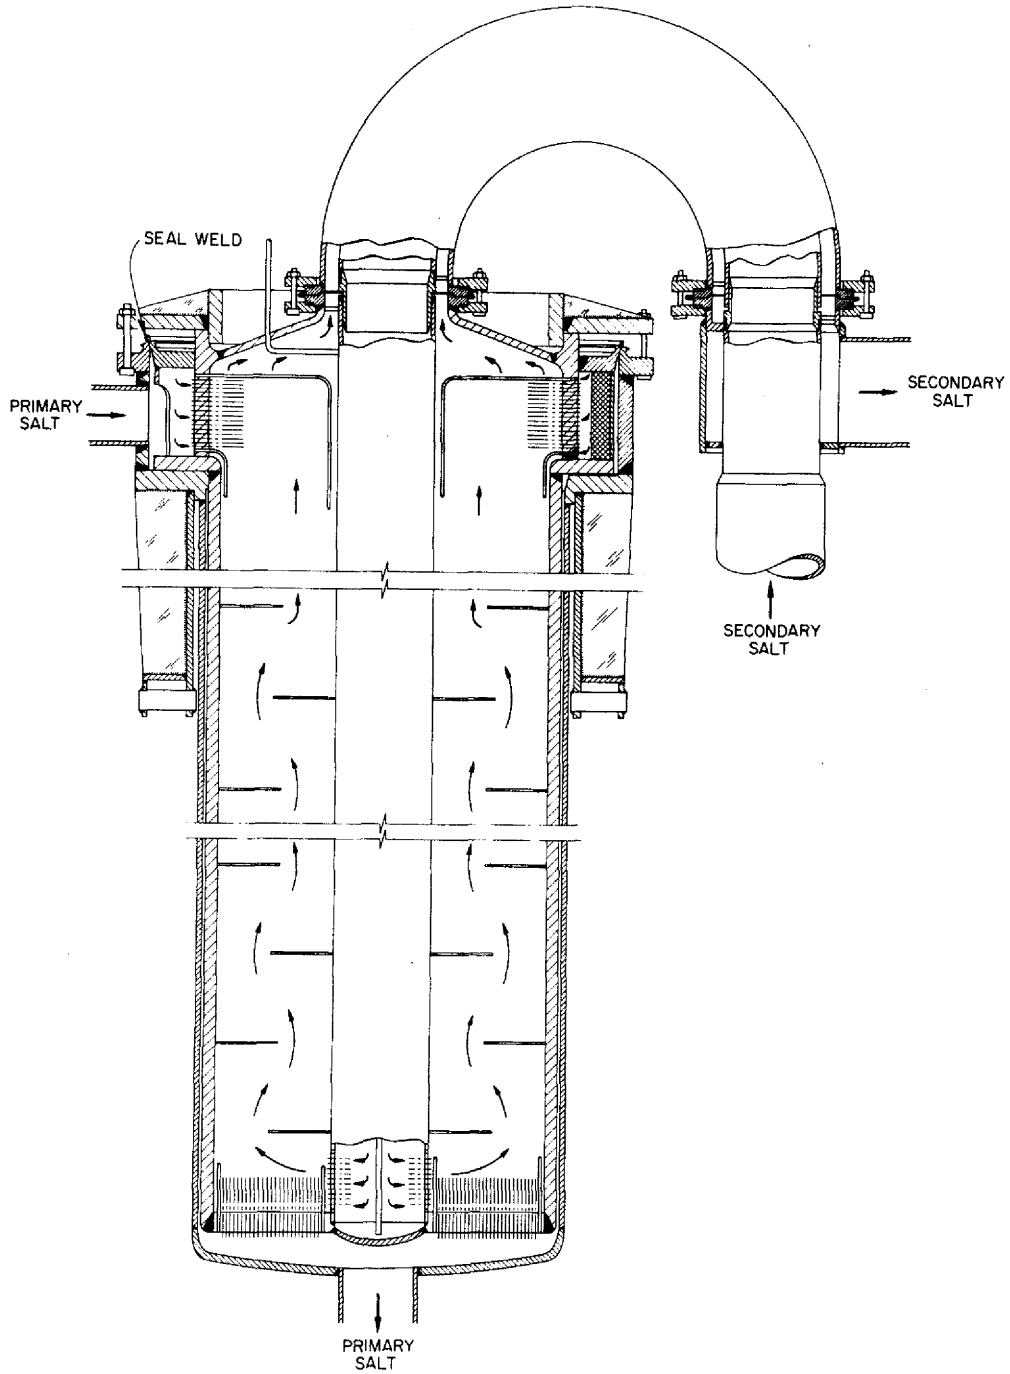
Cross-Sectional Elevation of a Typical MSBR Primary Heat Exchanger.
